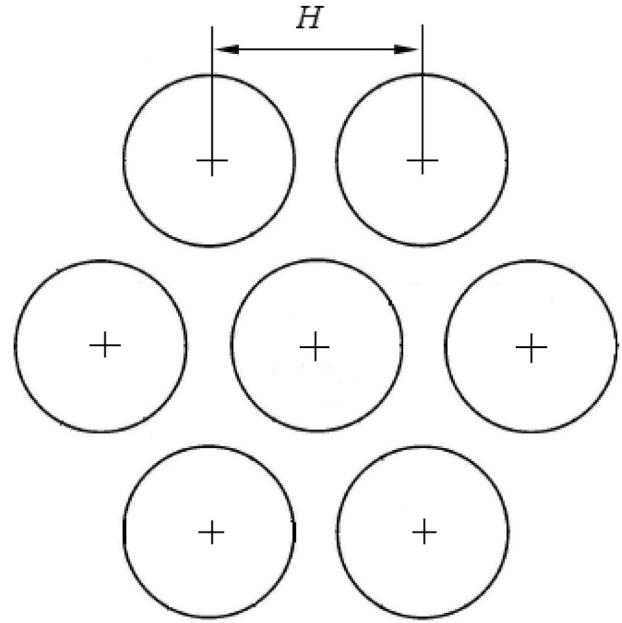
Tubesheet holes arranged in an equilateral triangle.
